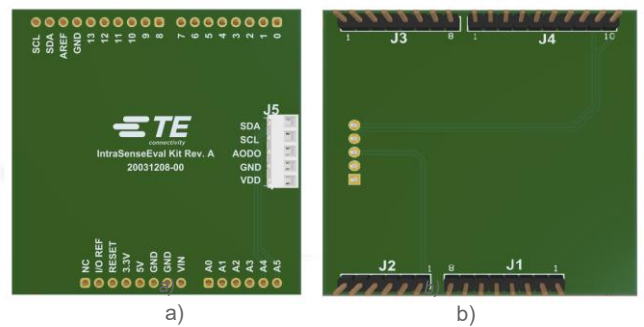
Arduino Shield for Calibrated IntraSense Kit. a) Top layer of PCBA. b) Bottom layer of PCBA.
